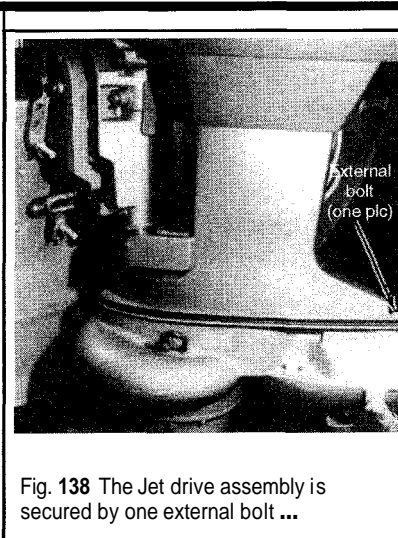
The Jet drive assembly is secured by one external bolt ...
